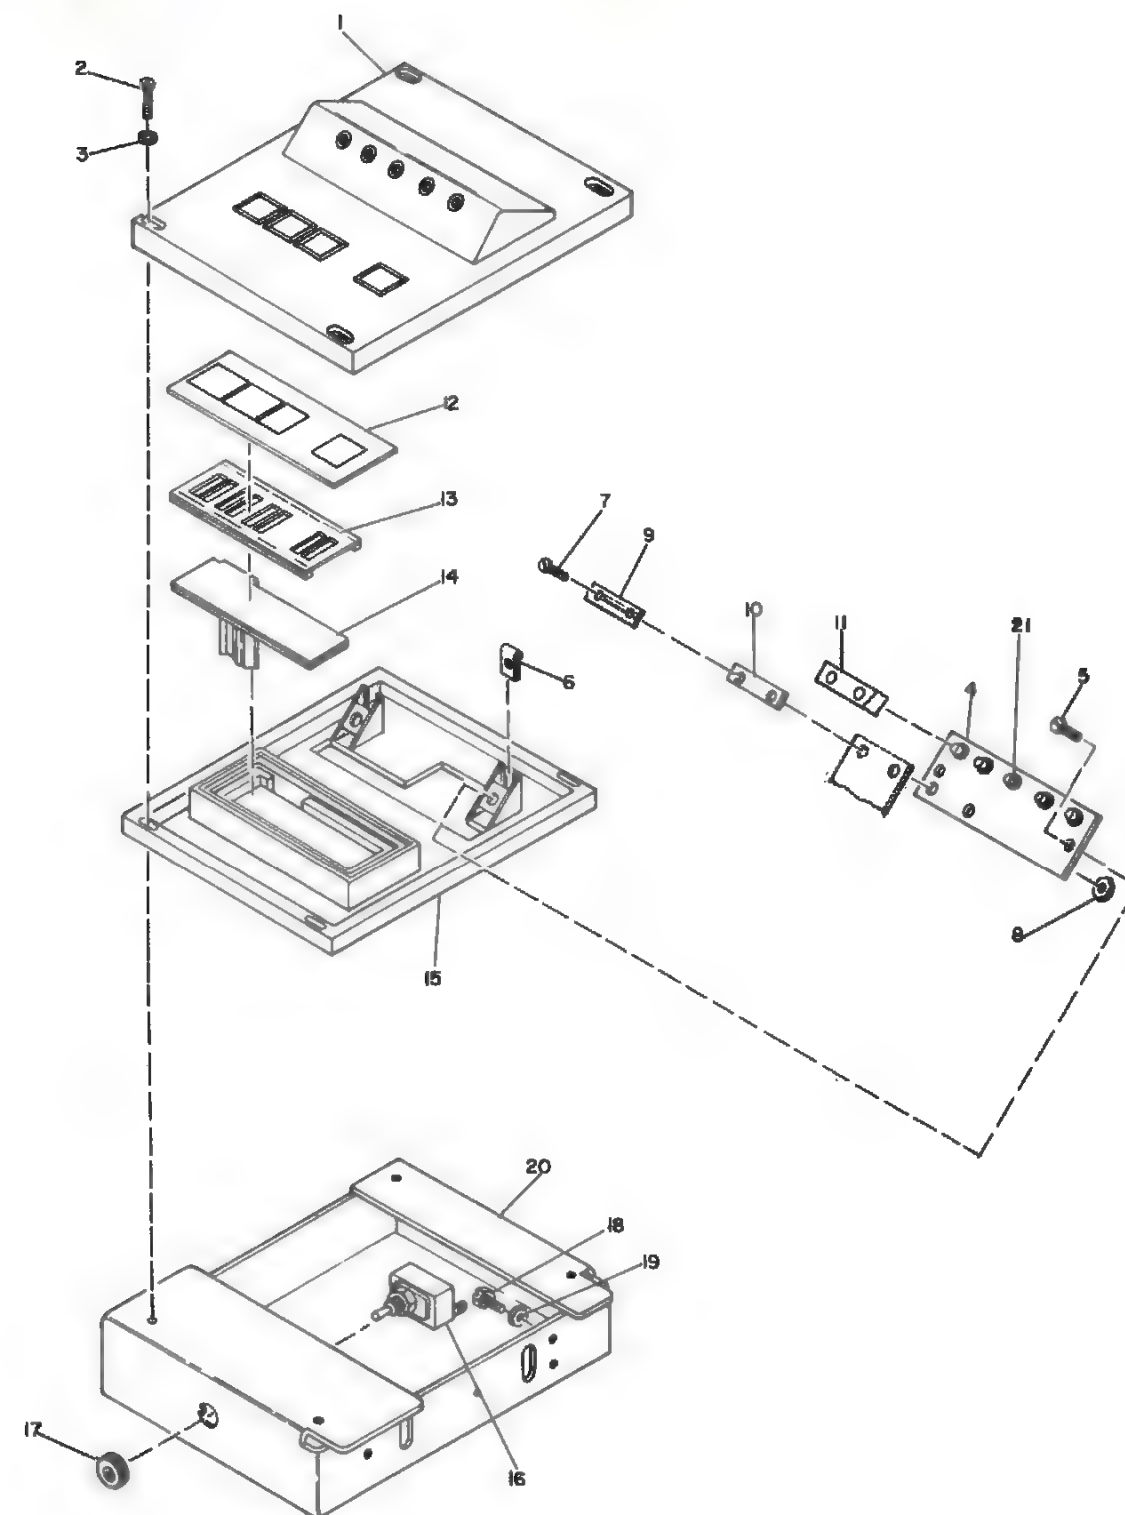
A. OPERATOR PANEL ASSEMBLY. SEE LIST 3A.
